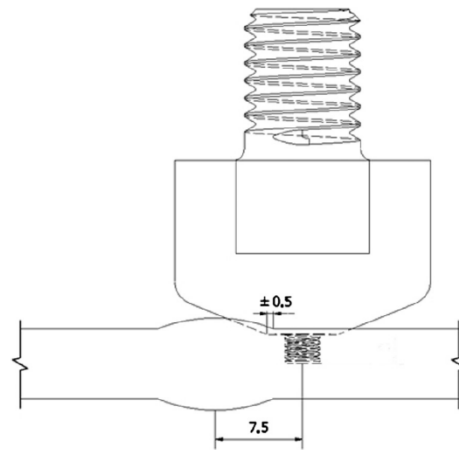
Schematic representation of the tool position relative to the MIG welded plate (dimensions in mm).
